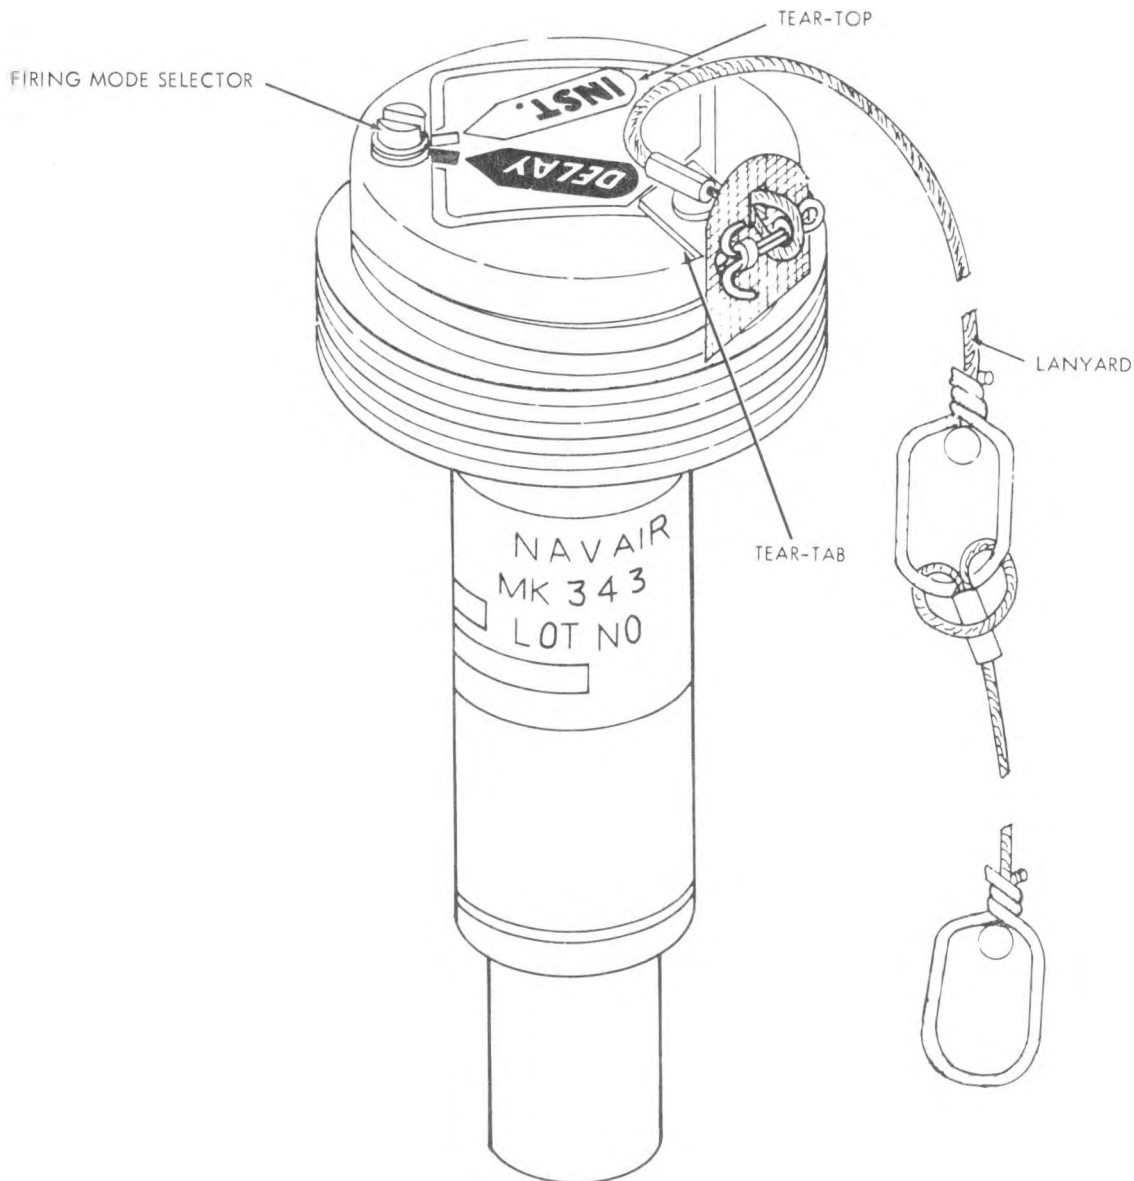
Mechanical Impact Bomb Fuze MK 343 Mod 0 — External View
